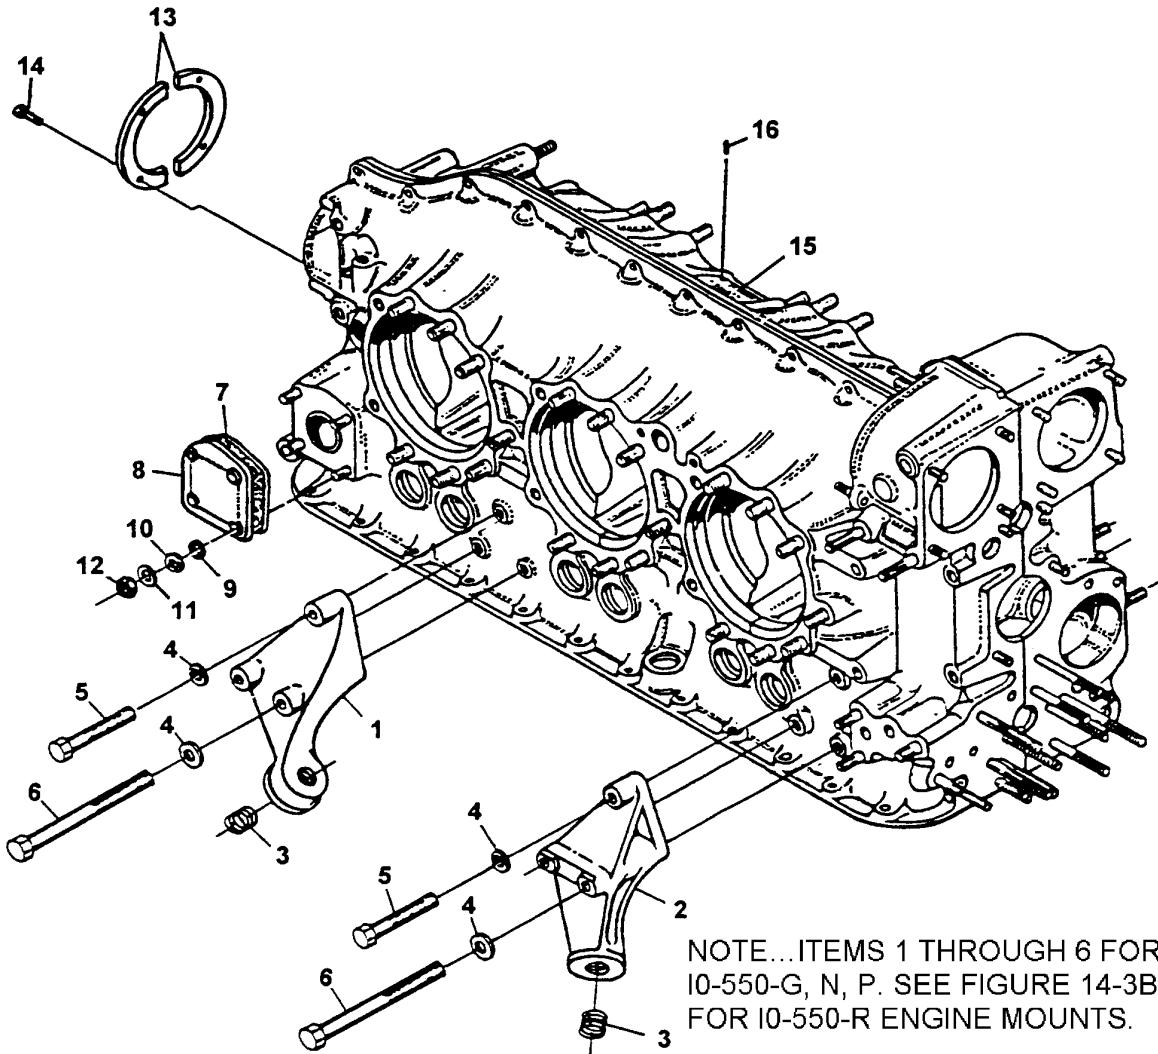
A. ENGINE MOUNTS, CRANKSHAFT SEAL & GOVERNOR COVER IO-550-A, B & C
